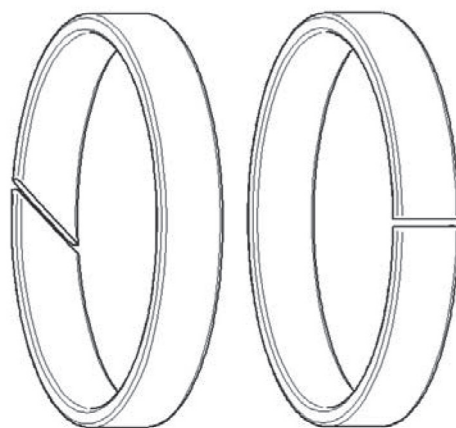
Typical examples of rectangular-cut-section bearing rings with angle cut (left) and straight cut (right)
